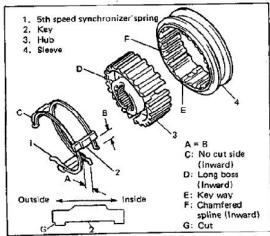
A-79 Assembling 5th Speed Sleeve & Hub
